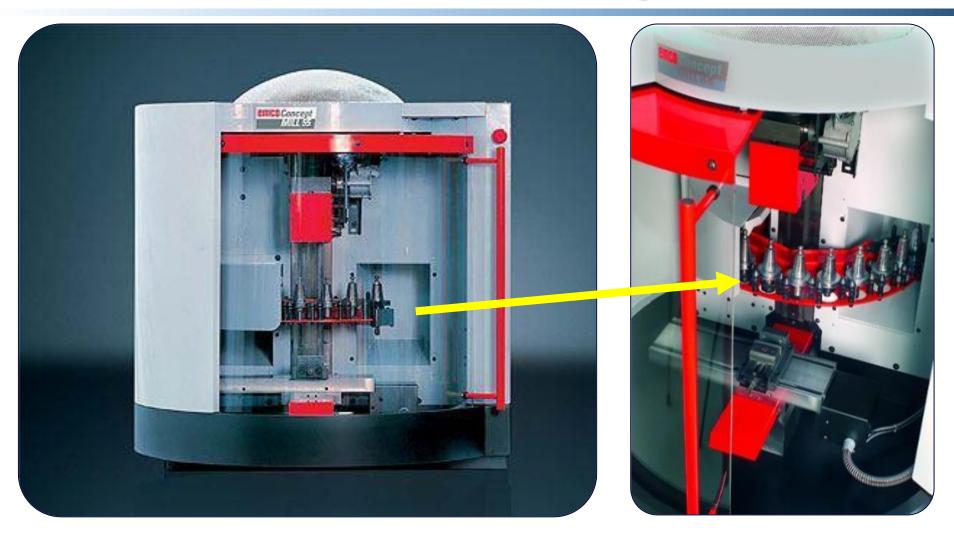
A vertical spindle machining center. Note the tool changer and carousel tool storage magazine (Photo EMCO)
